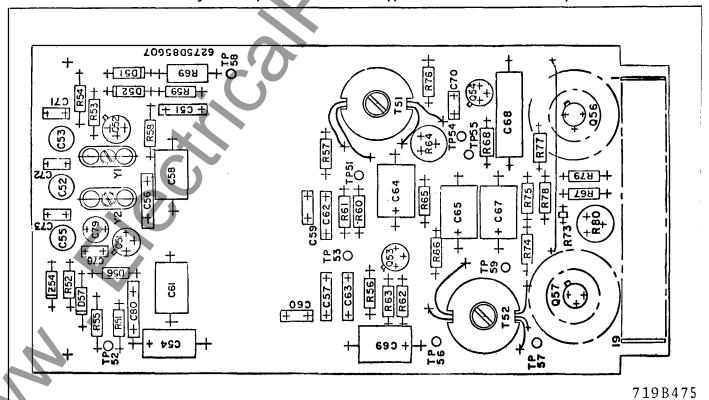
Component Locations of Transmitter Printed Circuit Board.
